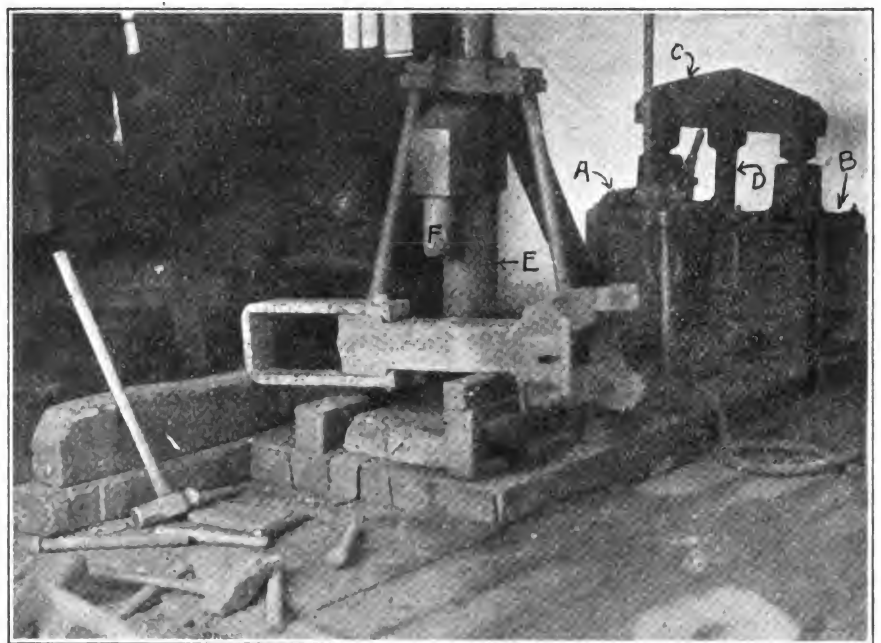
AN AIR-OPERATED RIVETER USED IN RIVETING YOKES TO DRAWBARS
